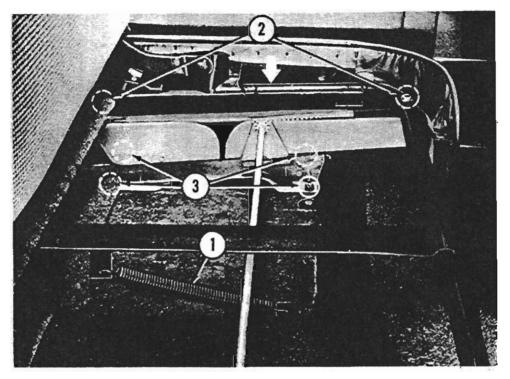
Club Sedan Front Seat Bottom Frame Assembly Screws, Adjusting Track Screws, and Retracting Spring.
